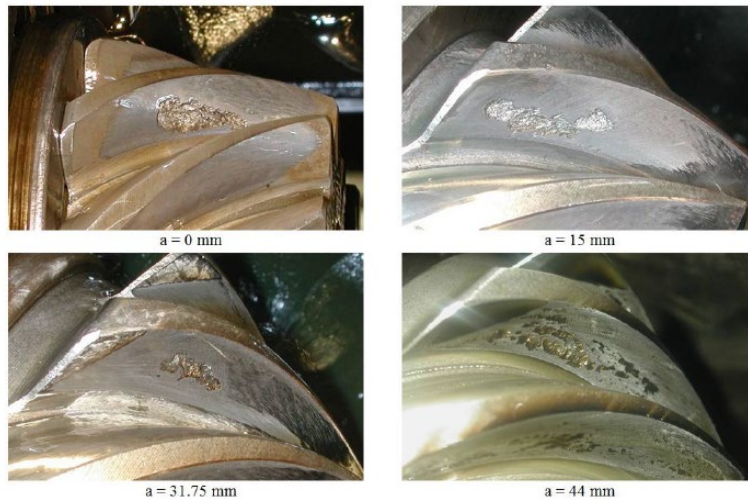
Typical pitting at the pinion flanks on the investigated test gears [10]
